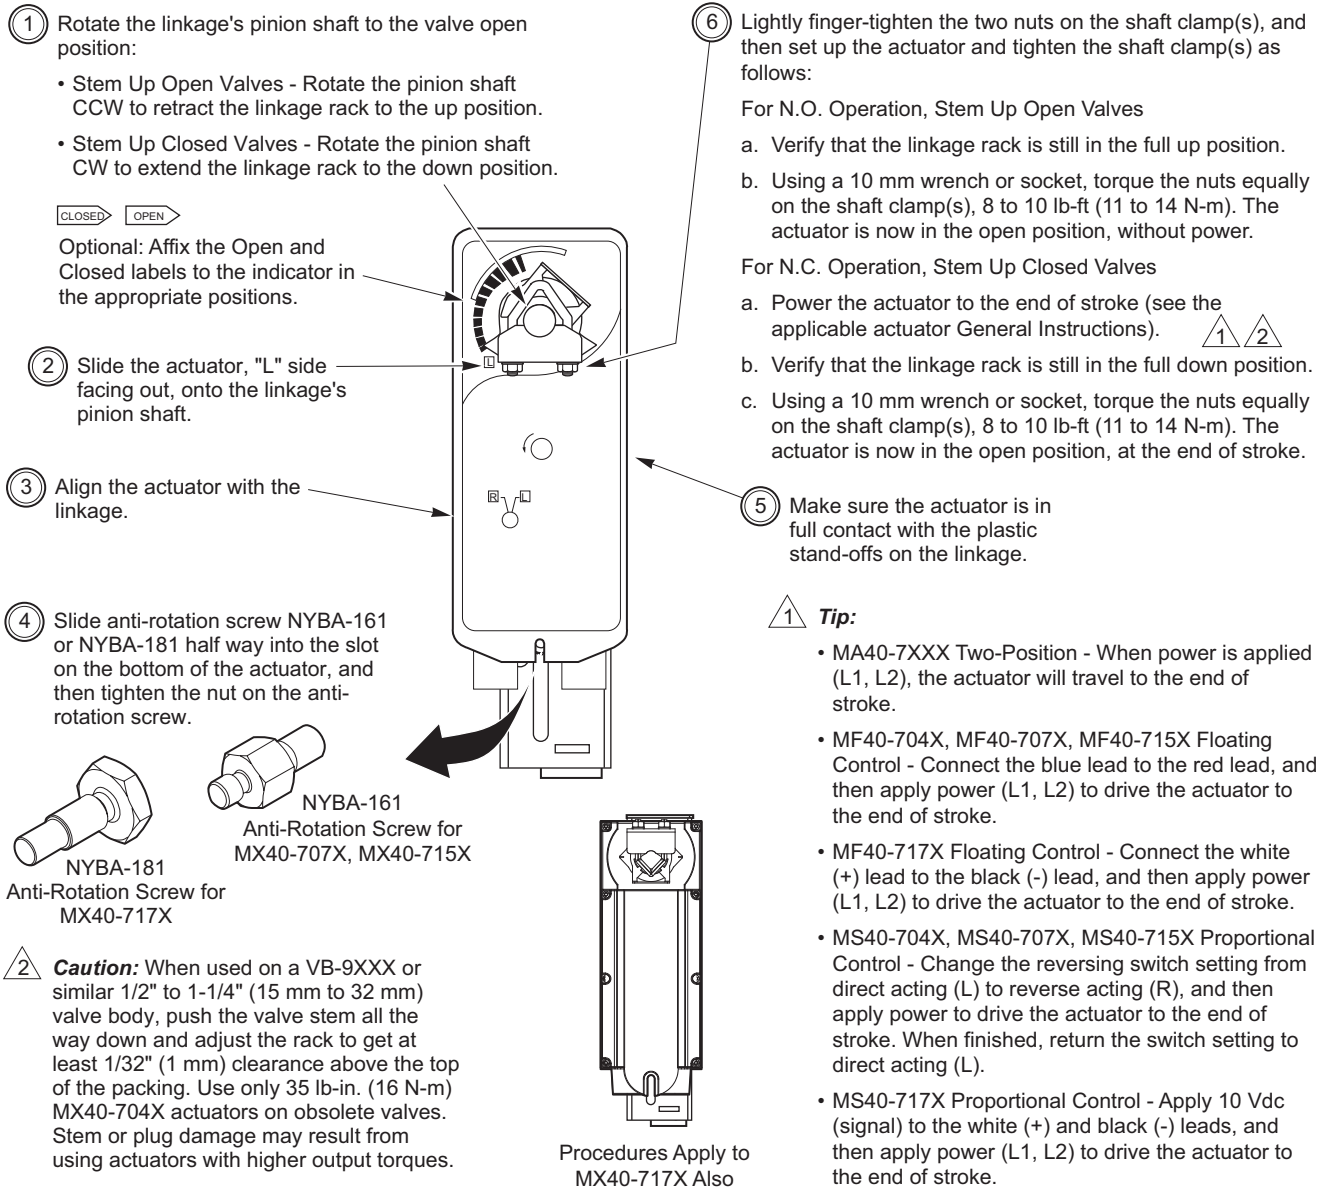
Mounting Spring-Return Actuator on 2-Way Valve and Setting Up Actuator/Linkage/Valve Assembly.
